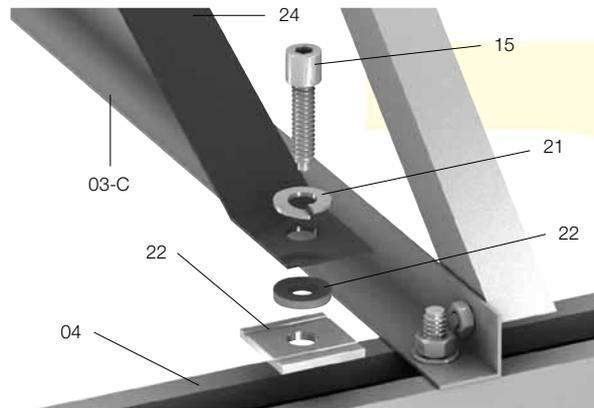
Fixing the Securing Cruciform and Mounting Rail
